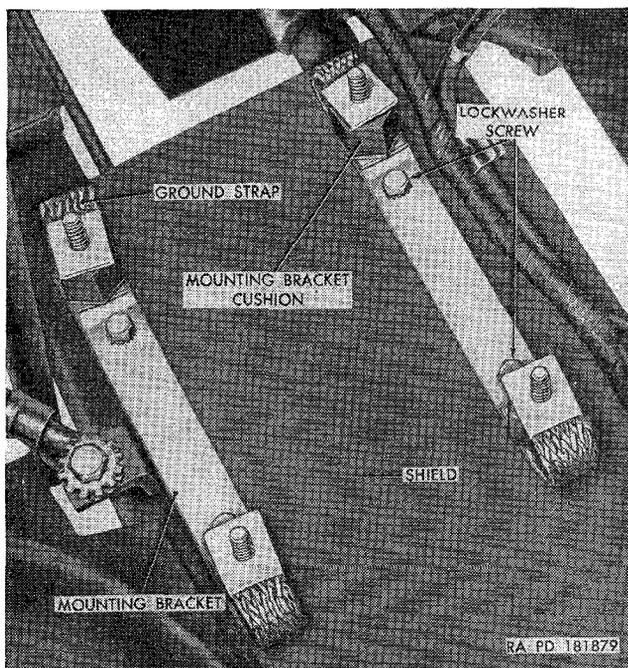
Generator regulator mounting brackets—installed (M38A1).
